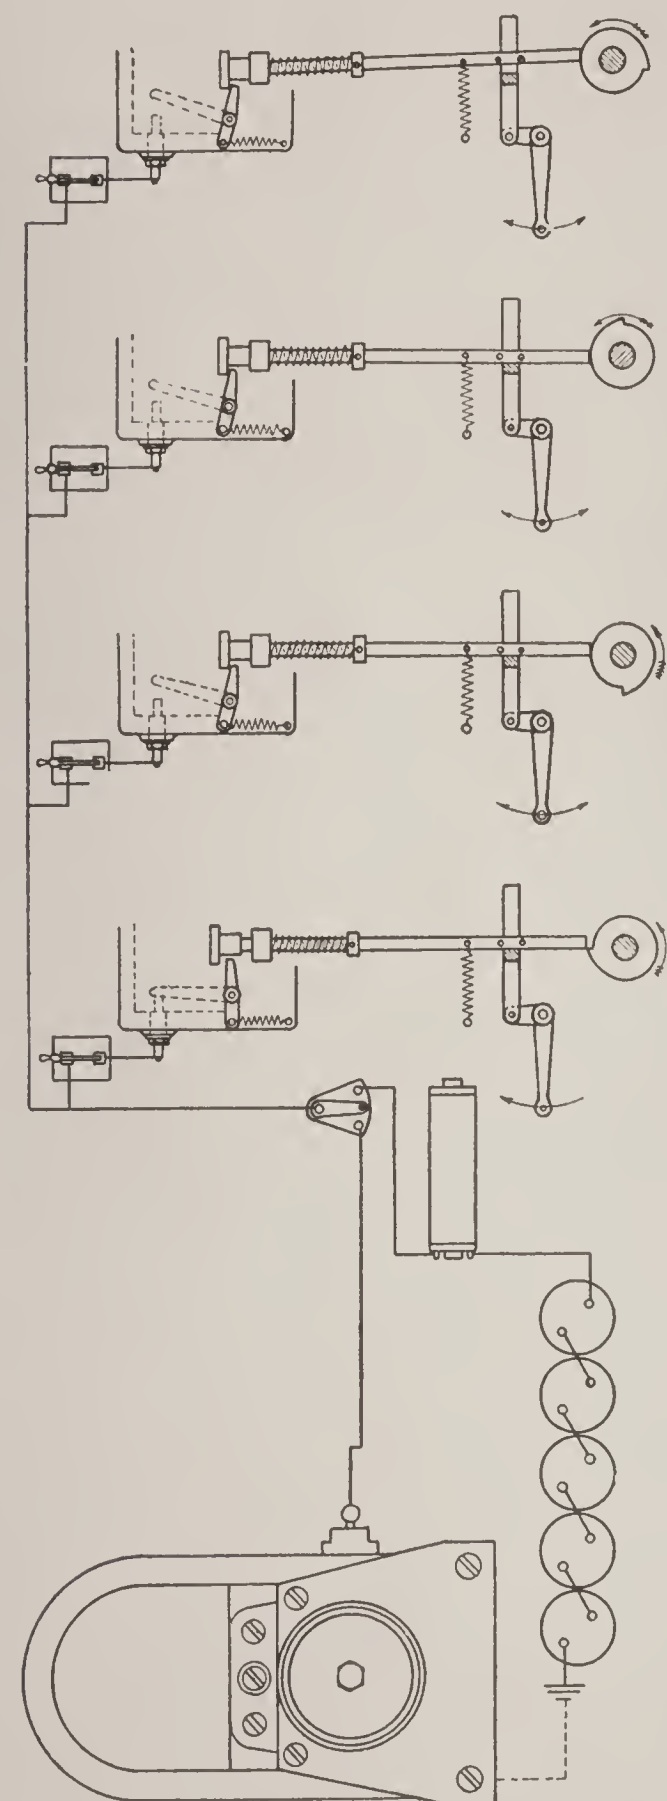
Four-Cylinder Low-Tension Ignition System (*Horseless Age*)
